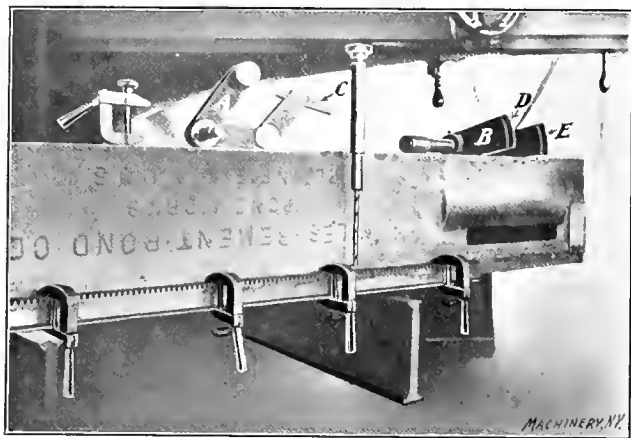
Special Clamps for Holding Rack in Position when Drilling, and Fixtures used for Locating Tumbler Locking Plate
